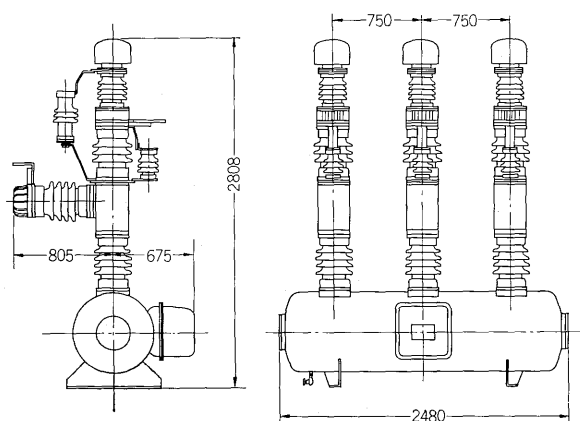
Outline drawing of RF 703 type (4000 amp)
